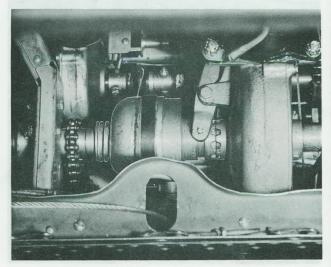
Landing-Gear Clutch, Teeth Disengaged
